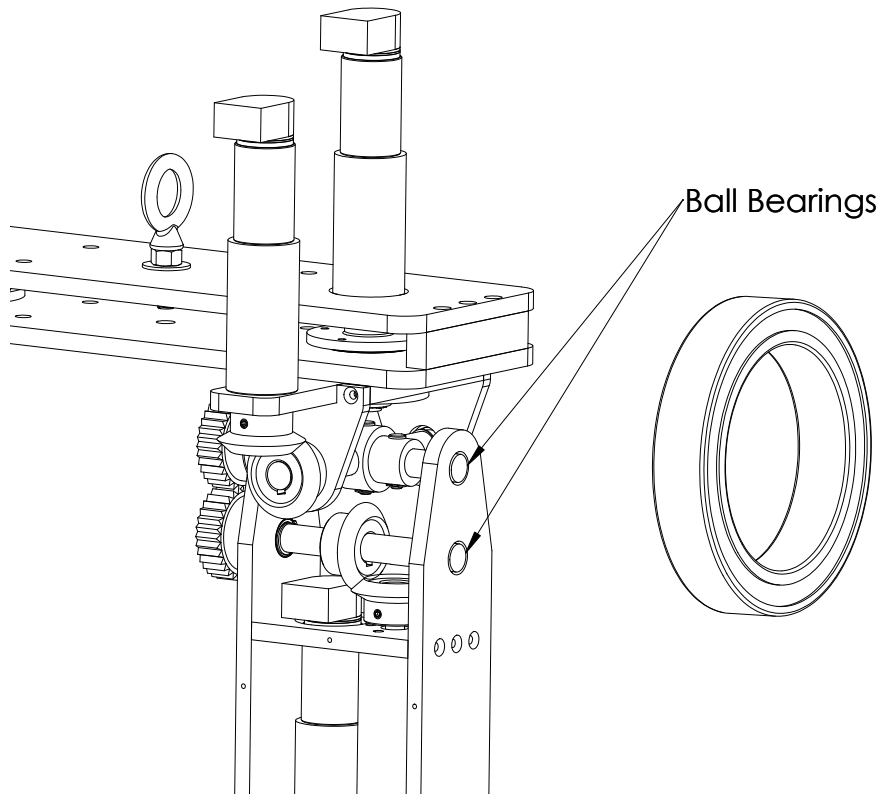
Enabling rotational motion of shafts using double shielded ball bearings.
